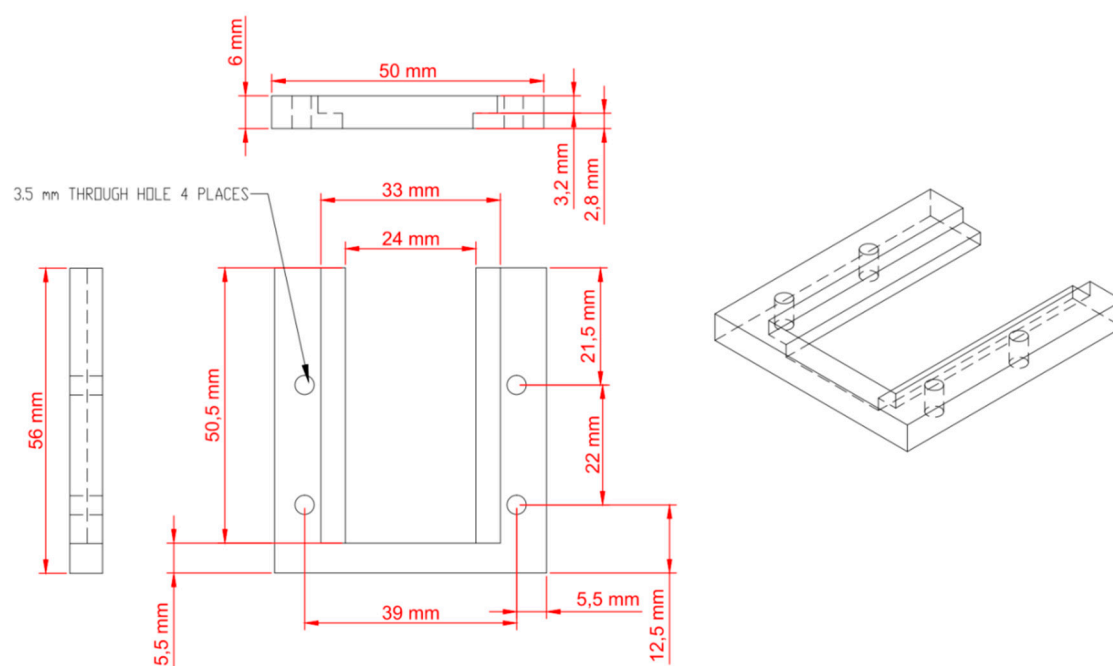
Detailed mechanical drawing of the bracket for the cantilever holder.
